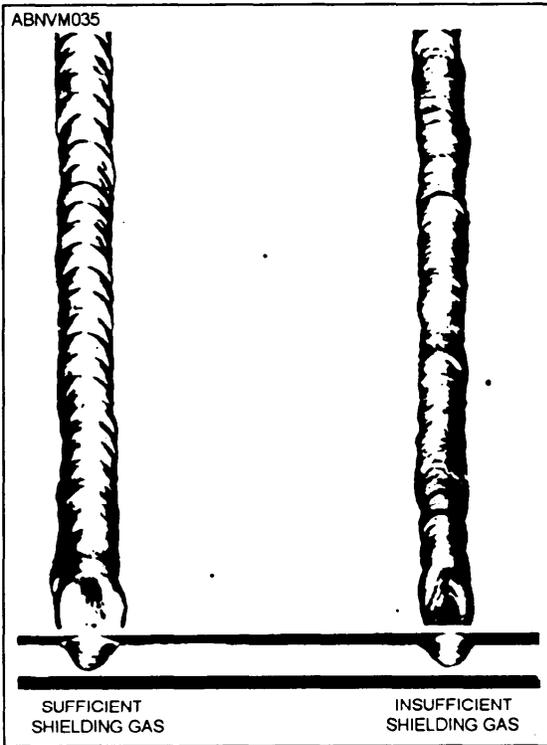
Comparative GTA weld beads as determined by shielding gas.
